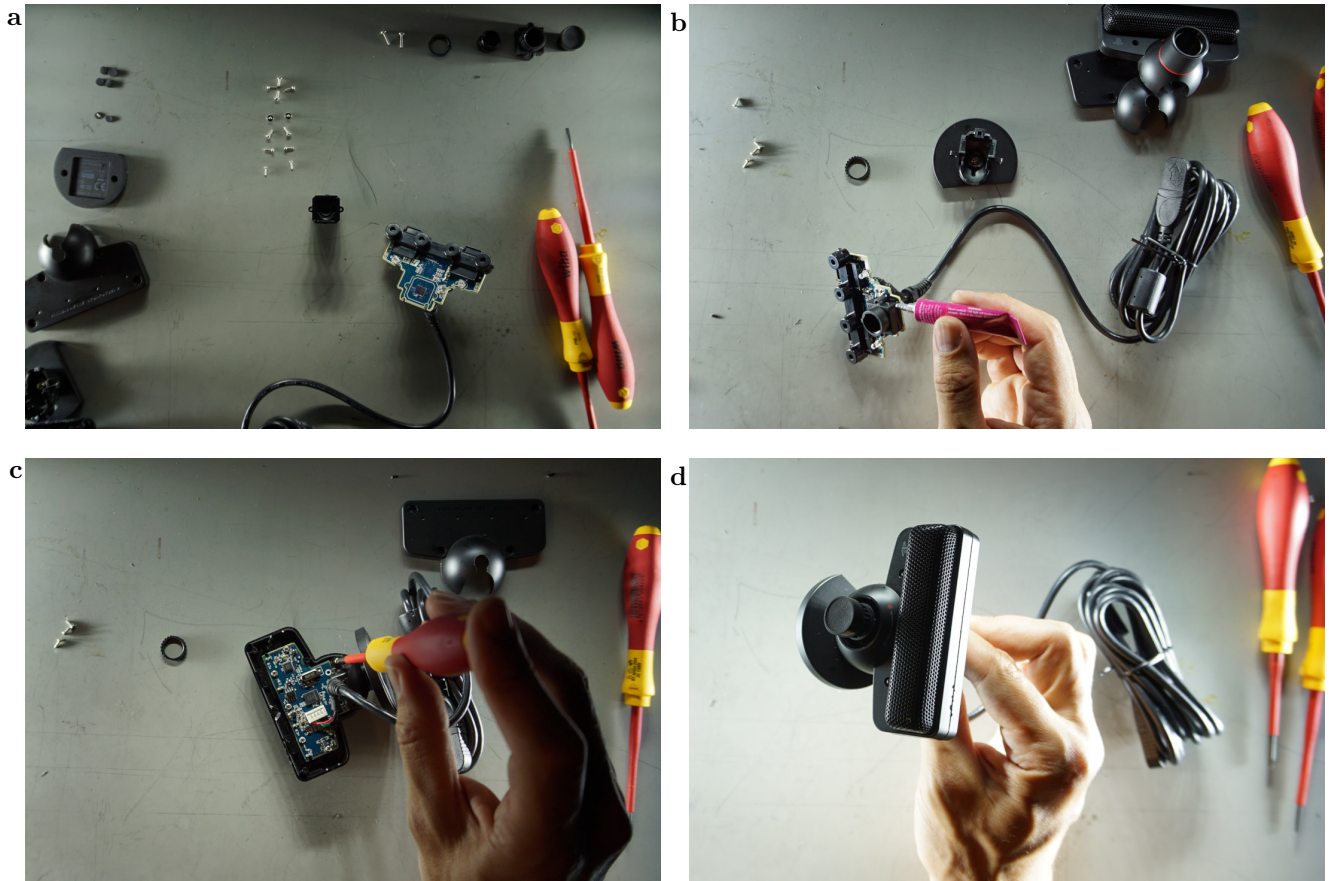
Modifying the camera: a: remove the lens from the front of the PCB. b: Attach the M12 lens mount in the same place. c: reattach PCB to camera case. d: Close camera case. Without the broken notches removed in Figure S1 c, some glue is needed. In the picture, the macro lens has a lens cover.
